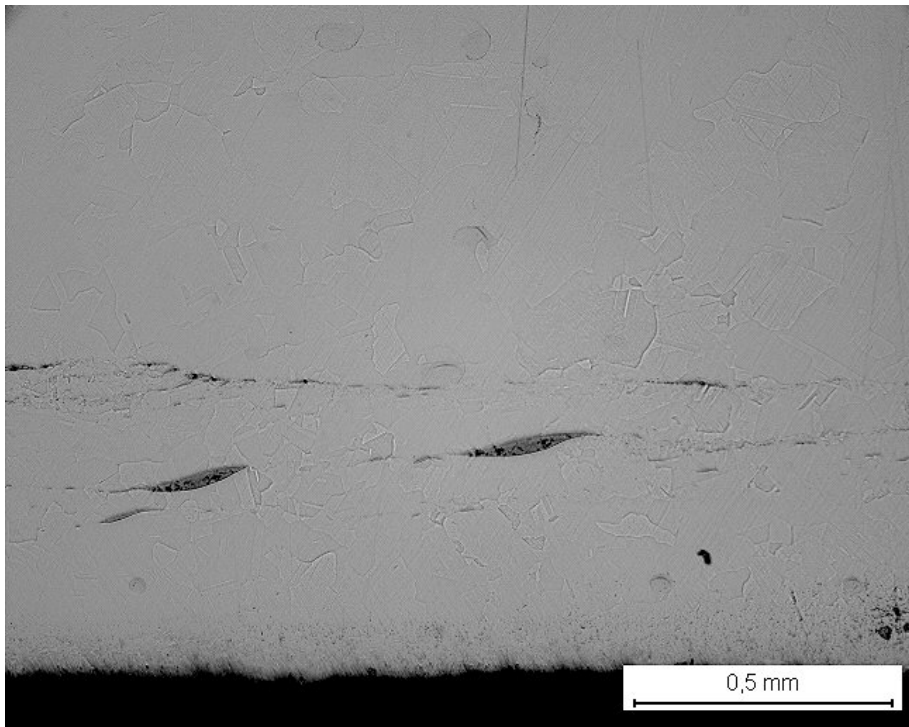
Traces of foreign material (W) near-surface in unmachined lid weld 20.
